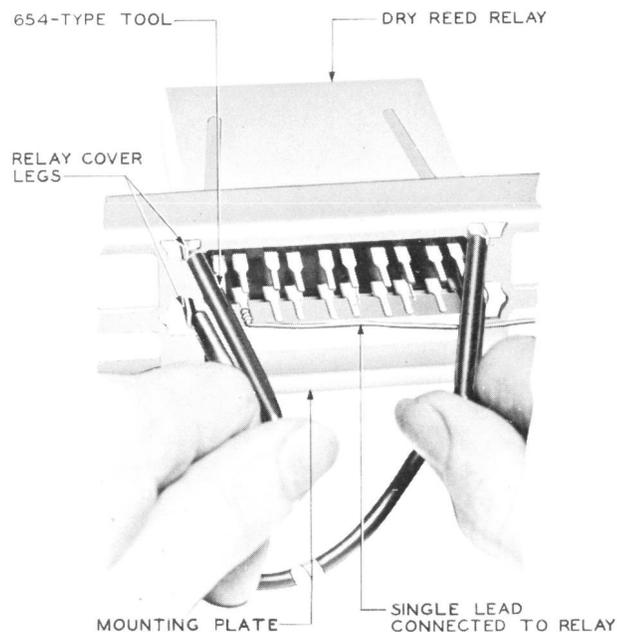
Method of Removing Dry-Reed Relay From Mounting Plate
